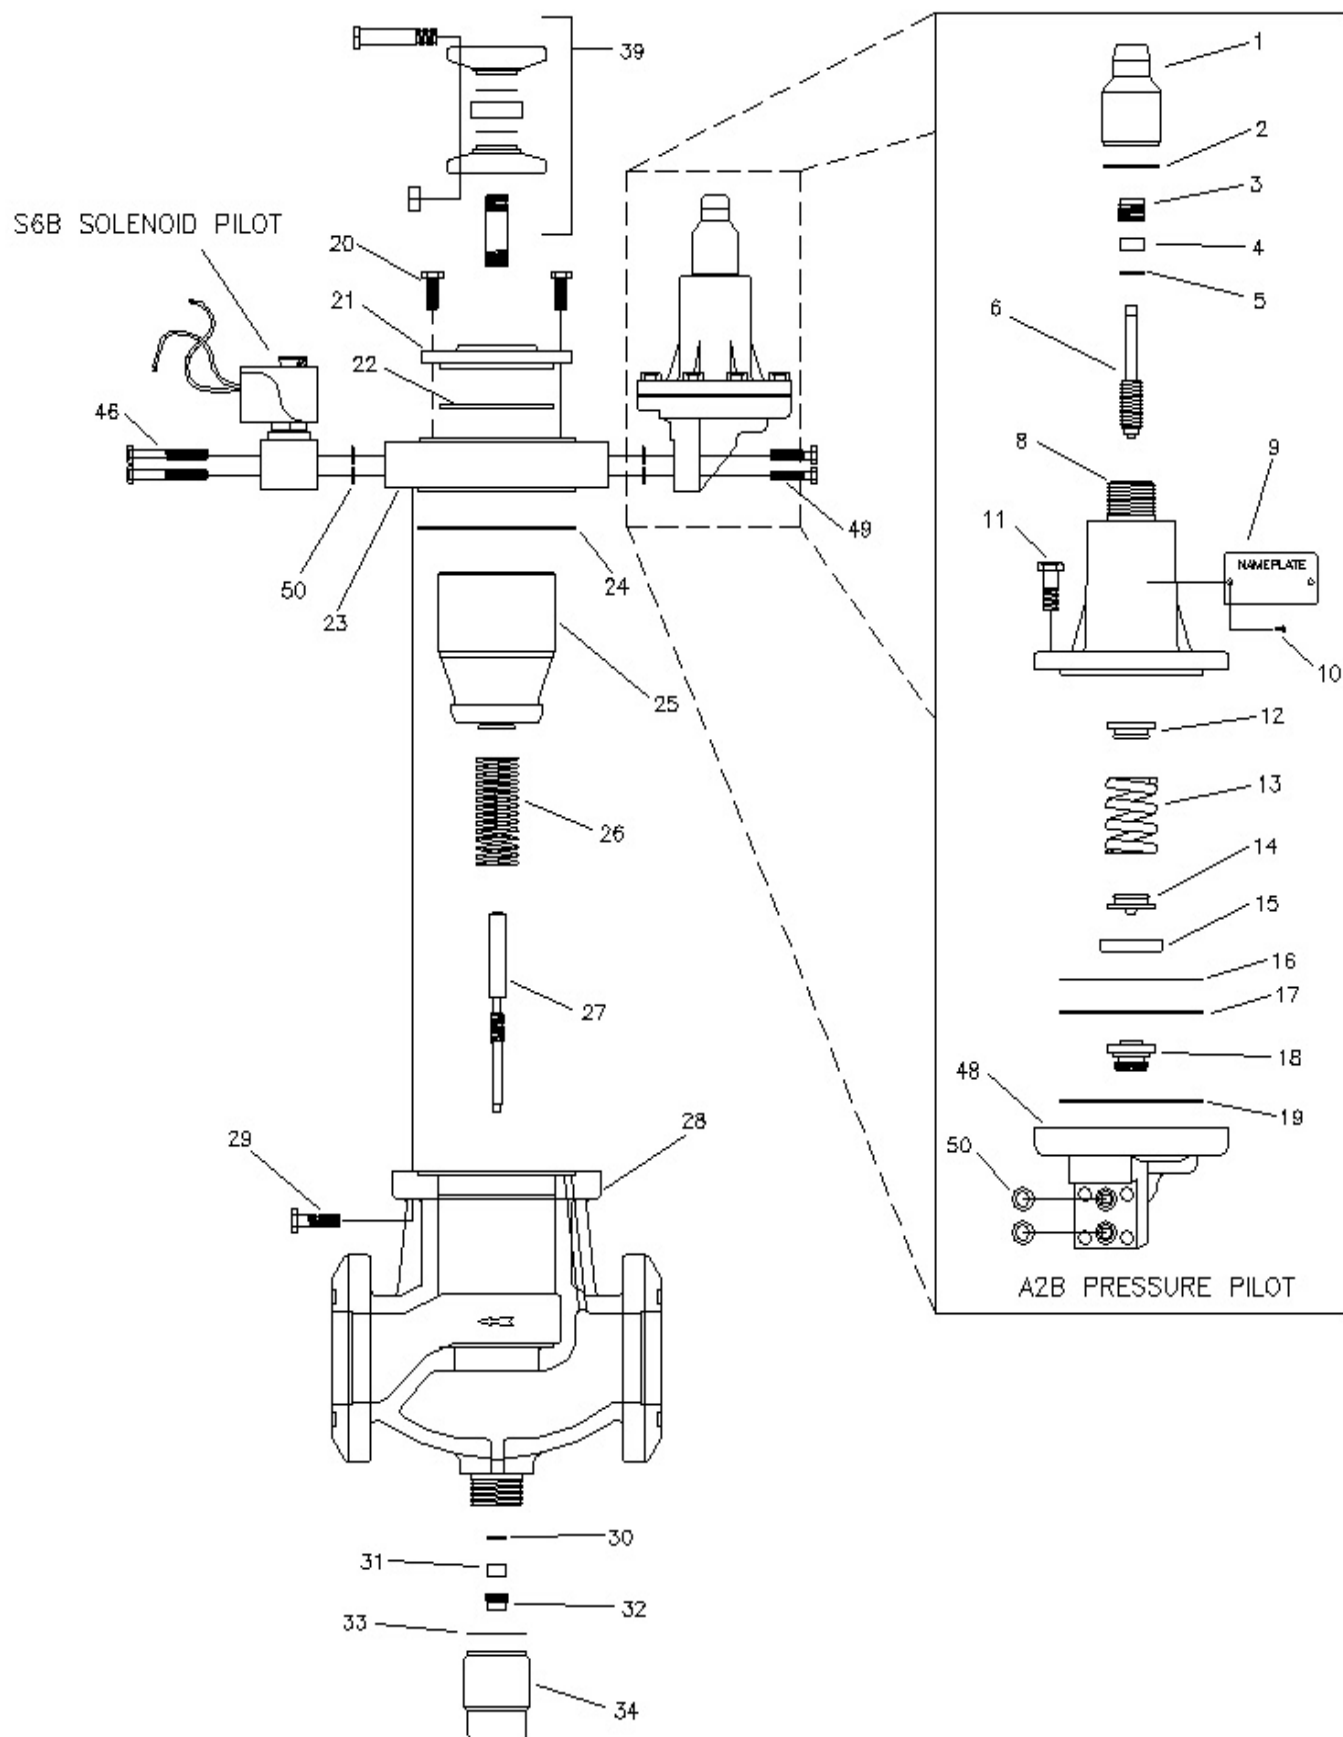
CK-5 1-1/4" - 4" Port Size Assembly and Parts List
